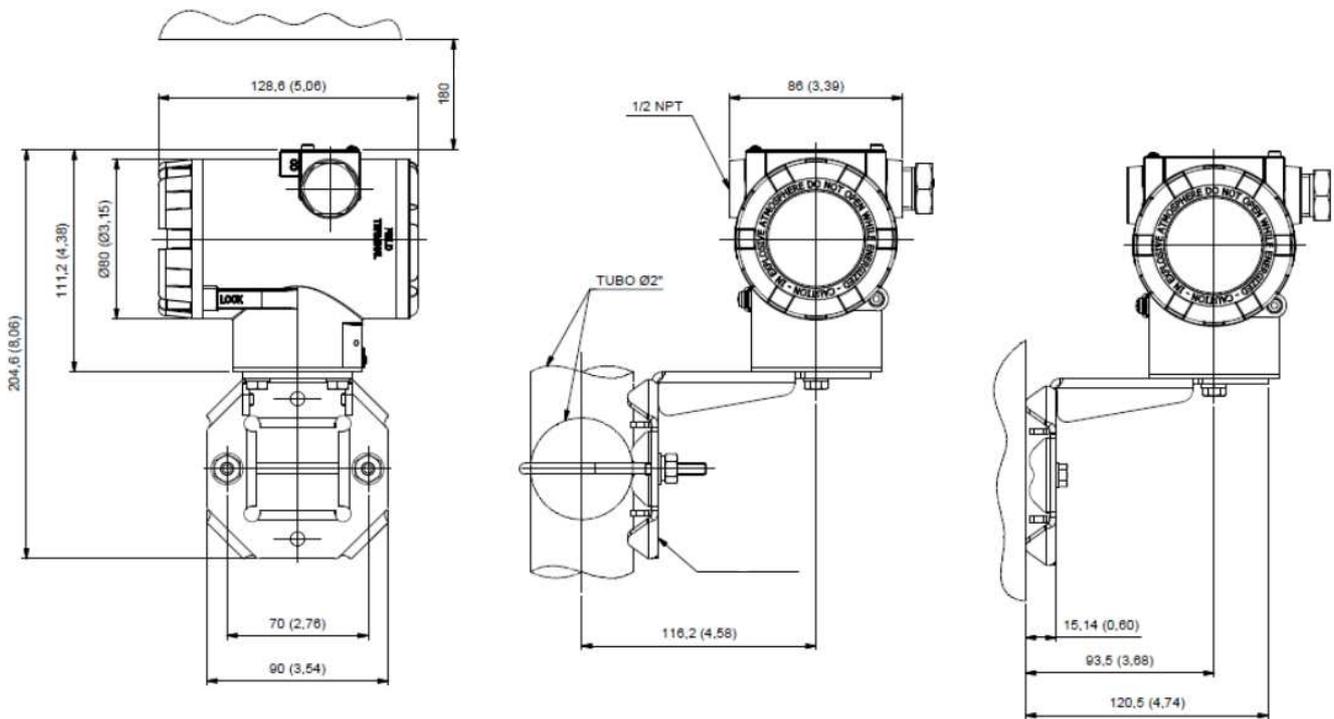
Dimensional and mounting drawings for VRI10-I.
